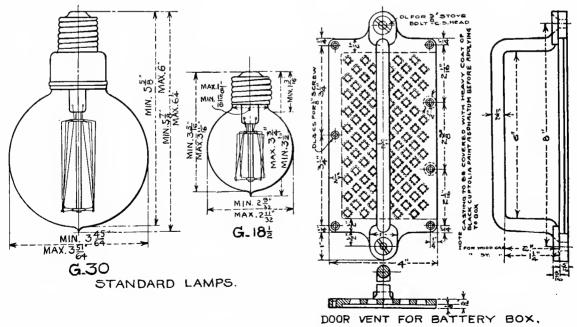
M. C. B. Recommended Practice for Battery Box Door Vent and Standard Lamps for Electric Lighting. (M. C. B. Sheet U9.)
